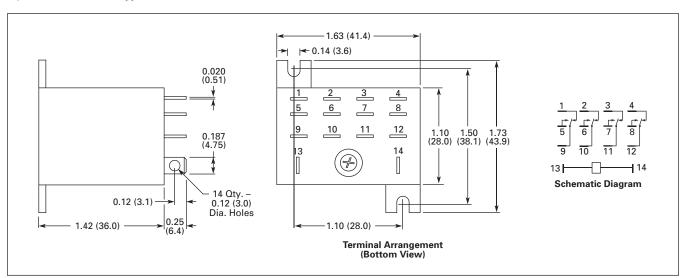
D7PR44 — Approximate Dimensions in Inches (mm)
